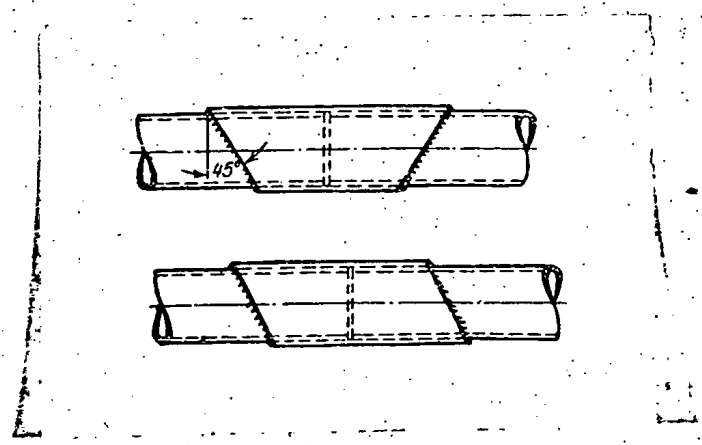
Tubes connected by couplings with oblique welds.
